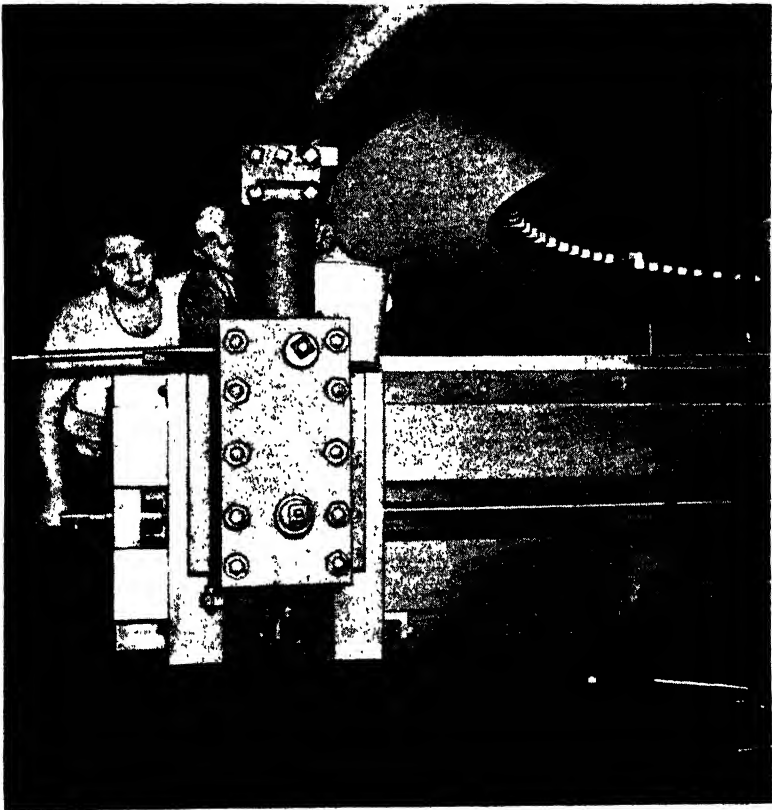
Special Machine Devised for Taking Turning, Facing and Boring Cuts on Circular Work at Radii up to 20 Feet
